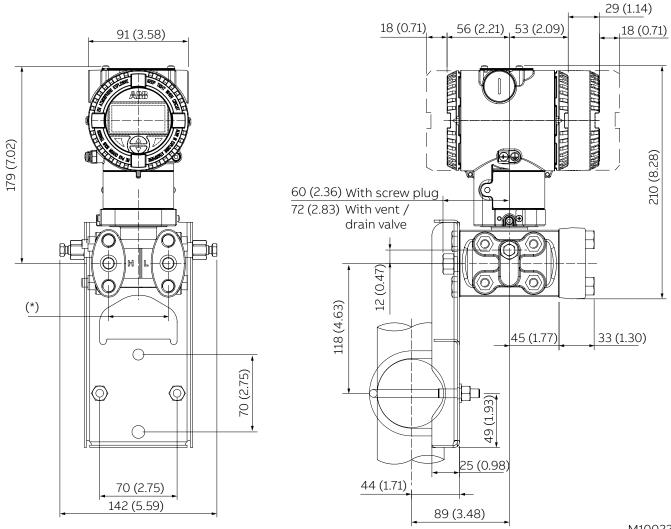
Transmitter with DIN aluminum housing - horizontal flanges with mounting bracket for vertical or horizontal mounting on 60 mm (2 in.) pipe
